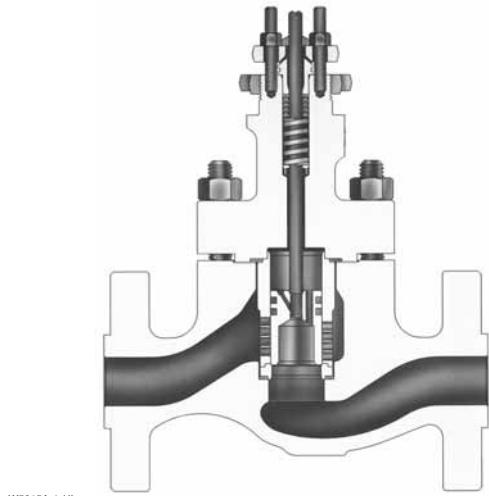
Design HPD Valve Assembly (NPS 2 to 6)
